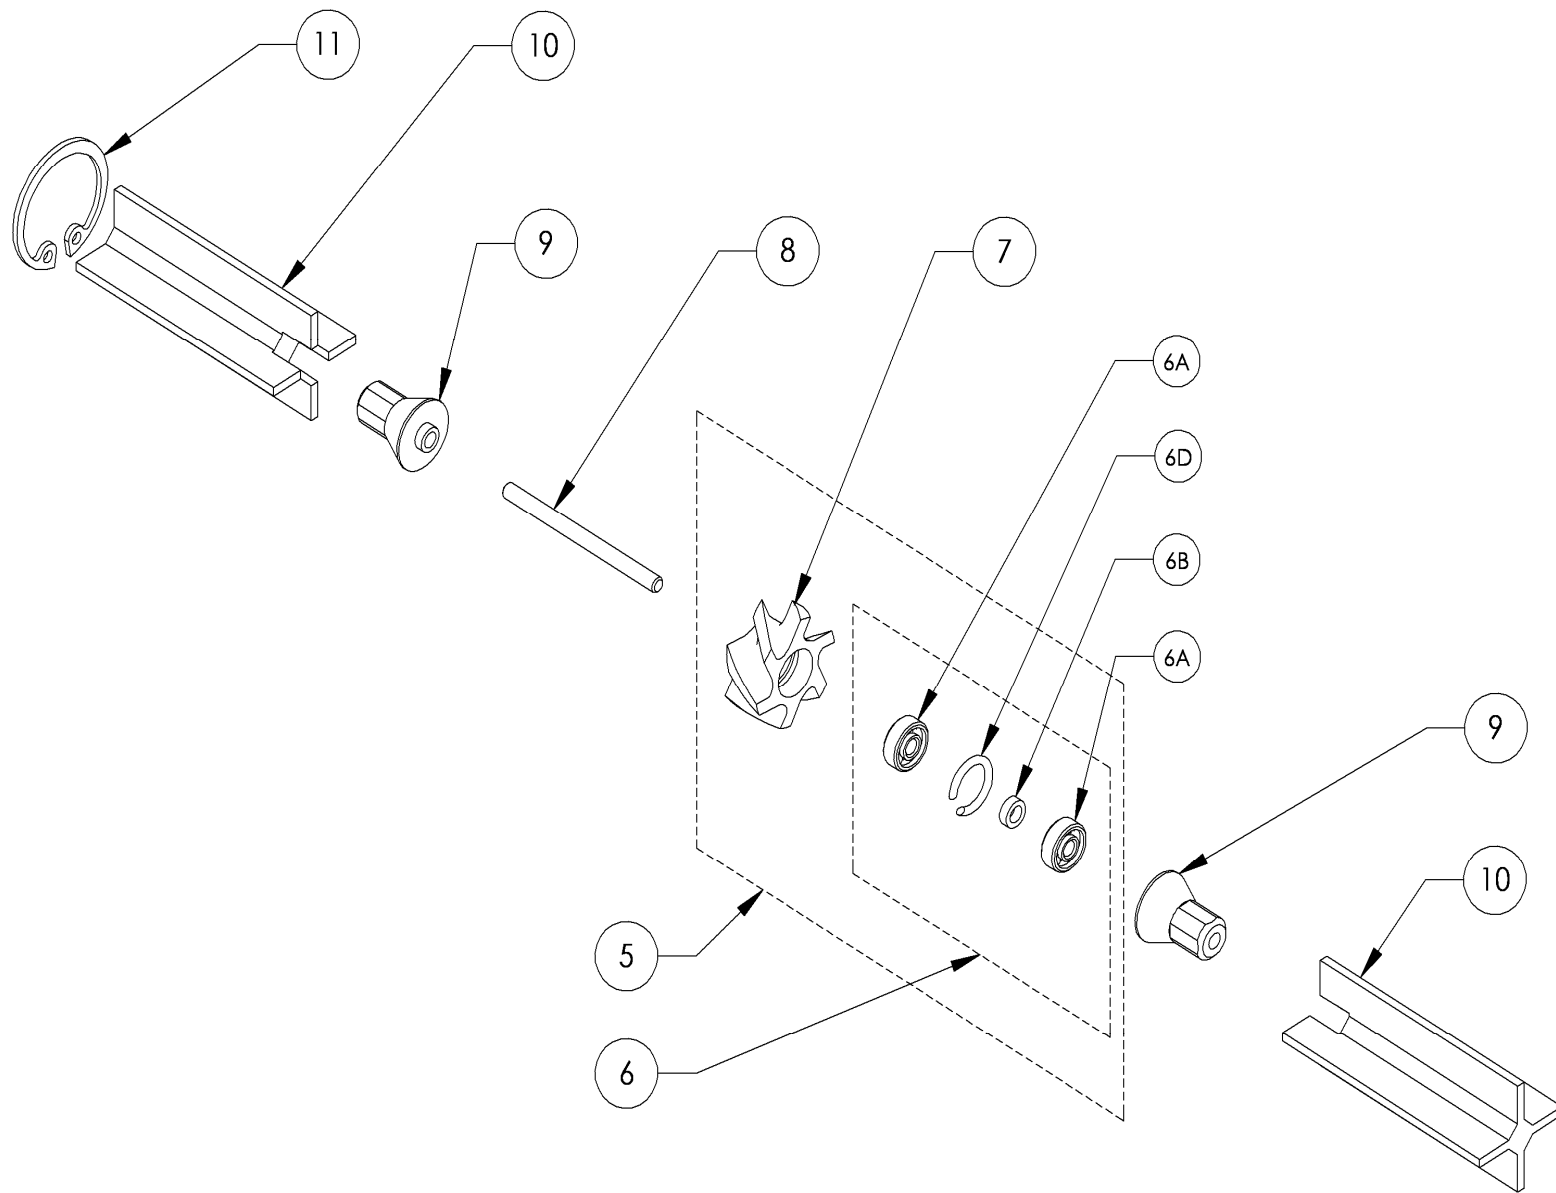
HS4-6 & 4-8 Ball Bearing Internal Assembly (Bearing Code A)
